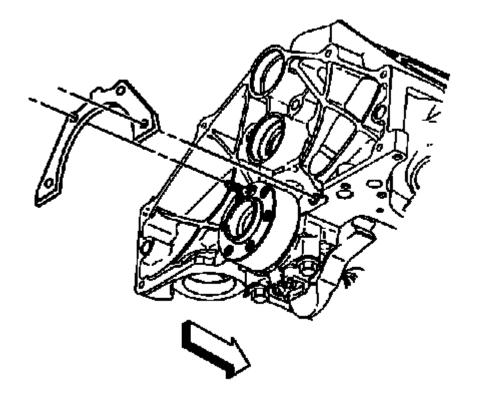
View Of Crankshaft Rear Oil Seal Housing Gasket Courtesy of GENERAL MOTORS CORP.
